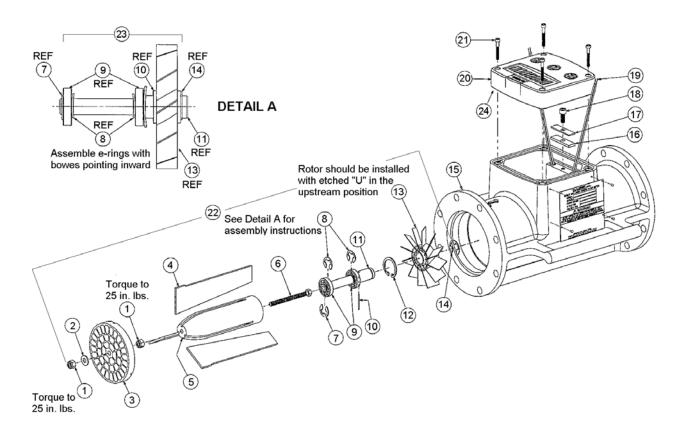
Meter Assembly Internals (3" and 4") (Reference Table 7-2)
